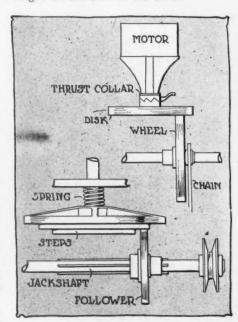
TYPES OF CYCLECAR-FRICTION DRIVES
